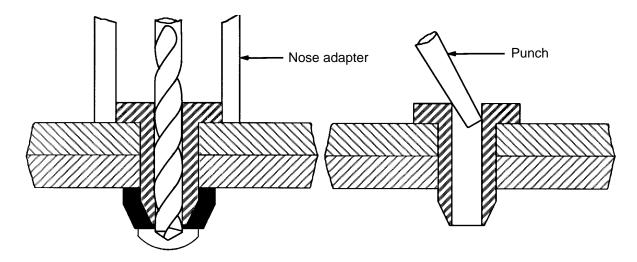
Screw Drill-Out Removal of Jo-Bolt
